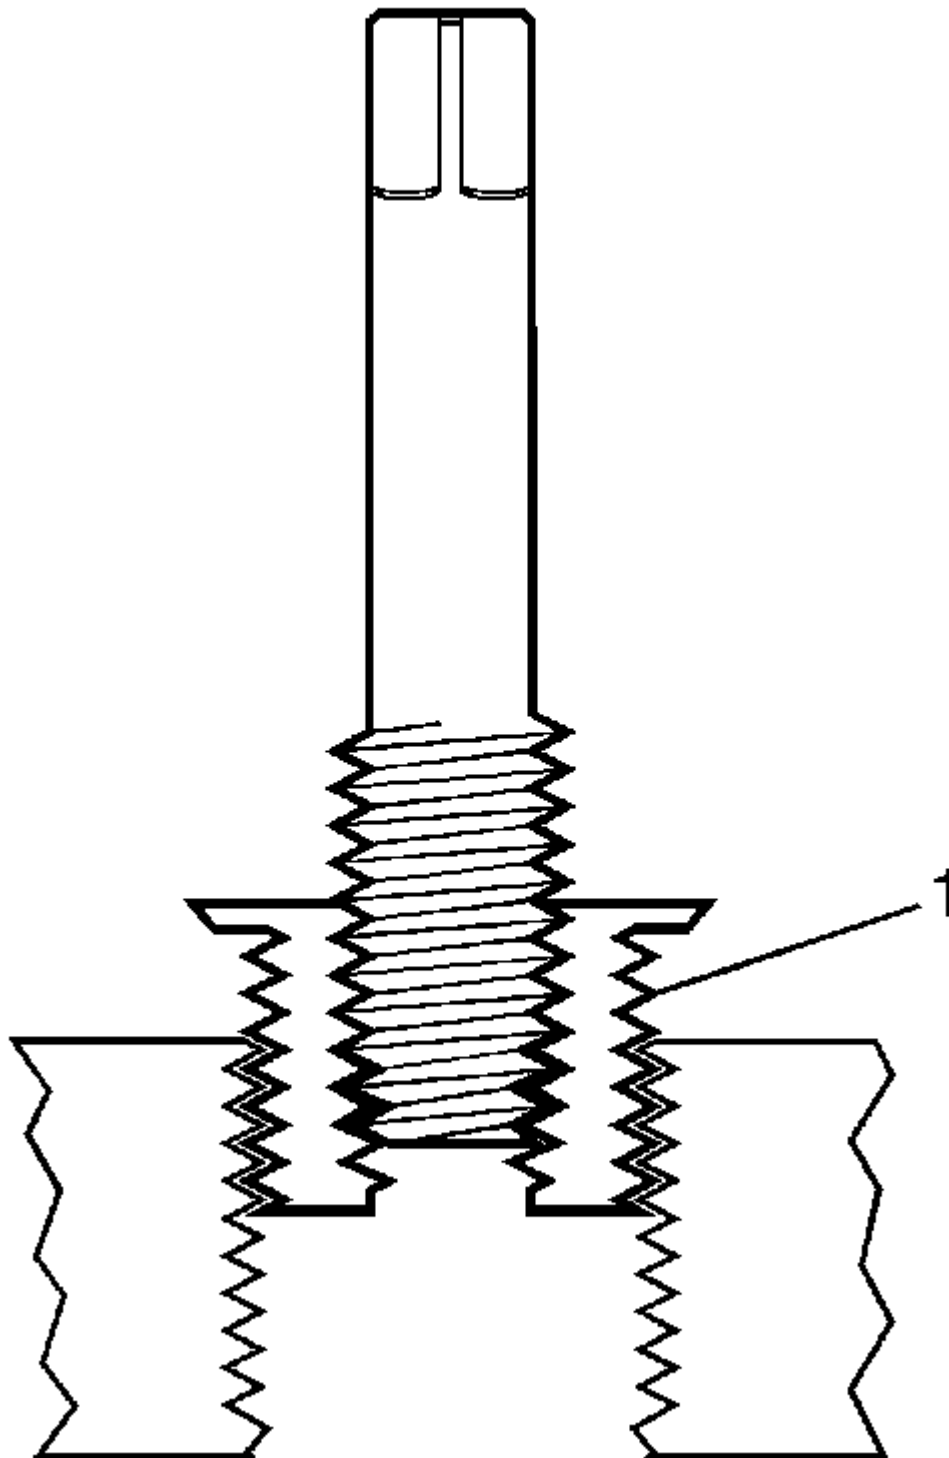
Identifying Insert & Driver Installation Tool
